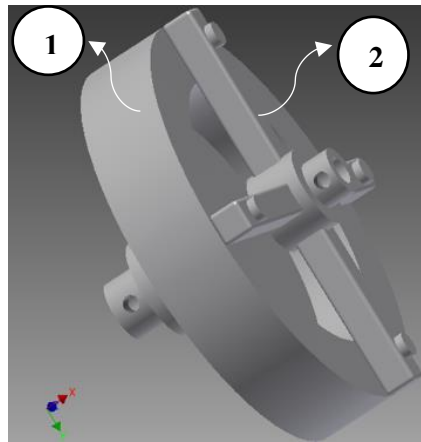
1050 (1) and 4140 (2) Steel Assembly.
